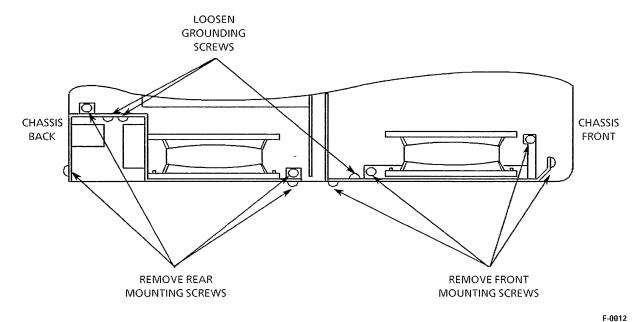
Front and Rear Fan Assembly Mounting Screws
